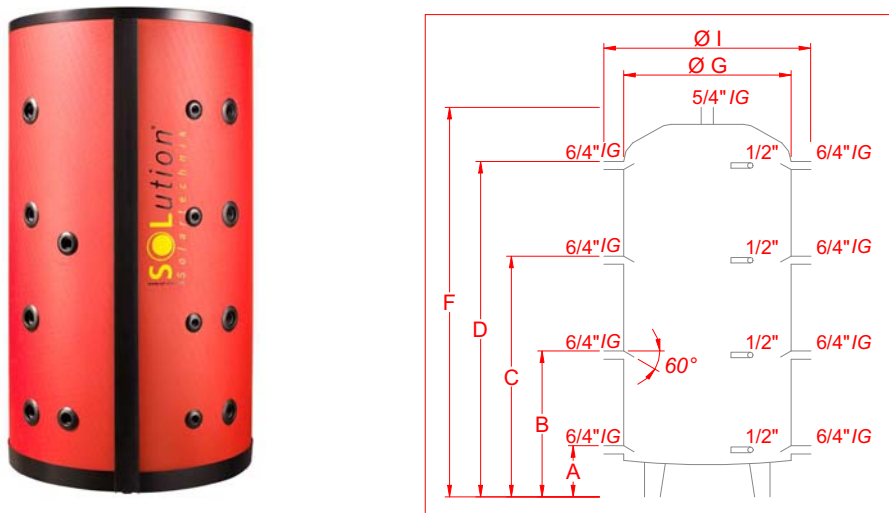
Heat storage tank (exterior view, cross-sectional view)
